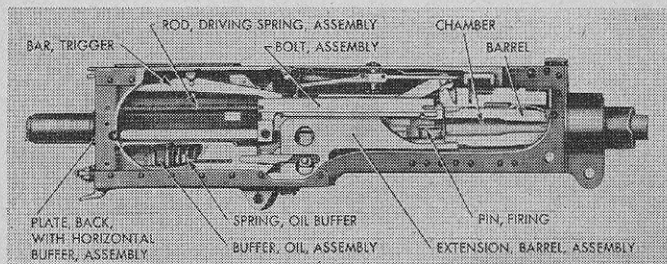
Cut-away section, caliber .50, M2 machine gun.
